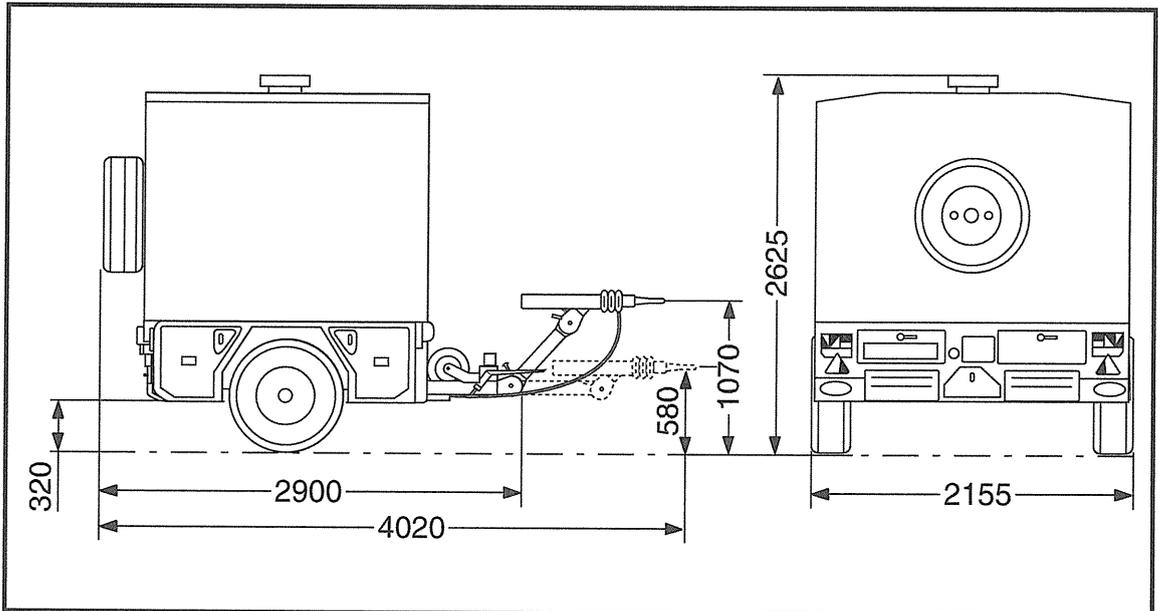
Dimensions of the trailer (variant 1), ready to move
